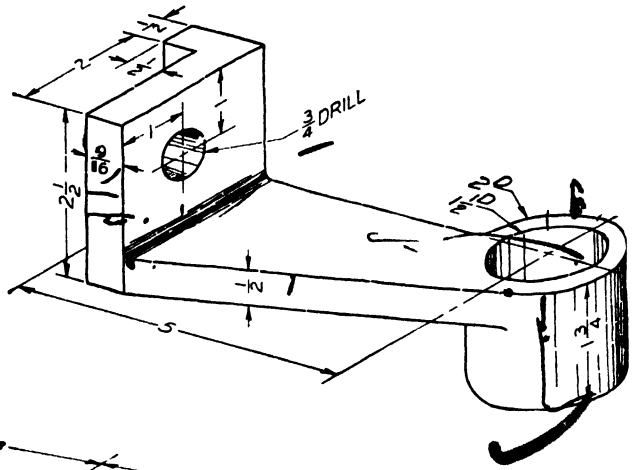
Prob. 137. Draw three complete views of the post bearing.
